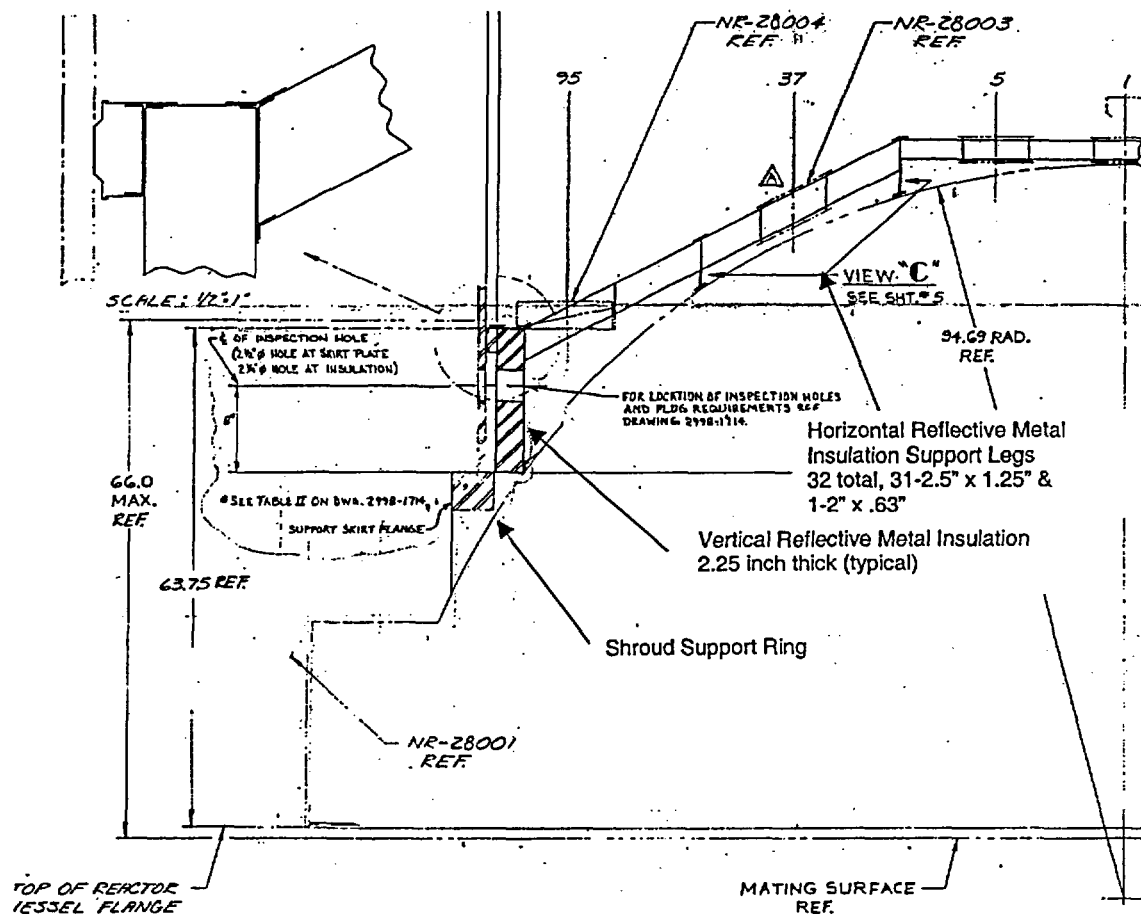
RPV Head Side View Showing Horizontal Insulation Support Leg Location
